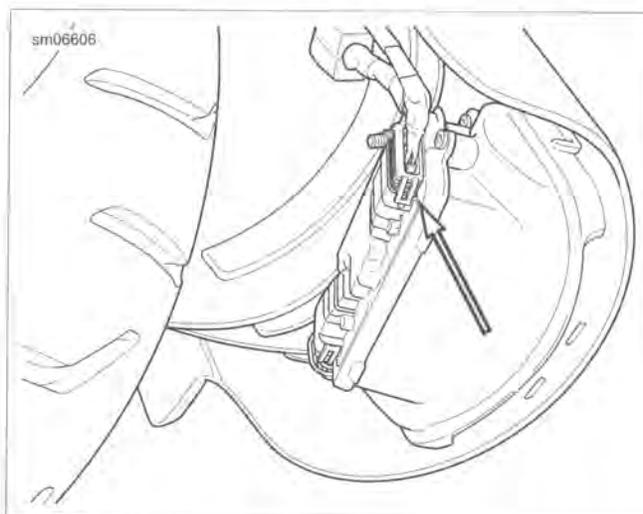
Rear Fender Lights Connector (FLHX/S)
